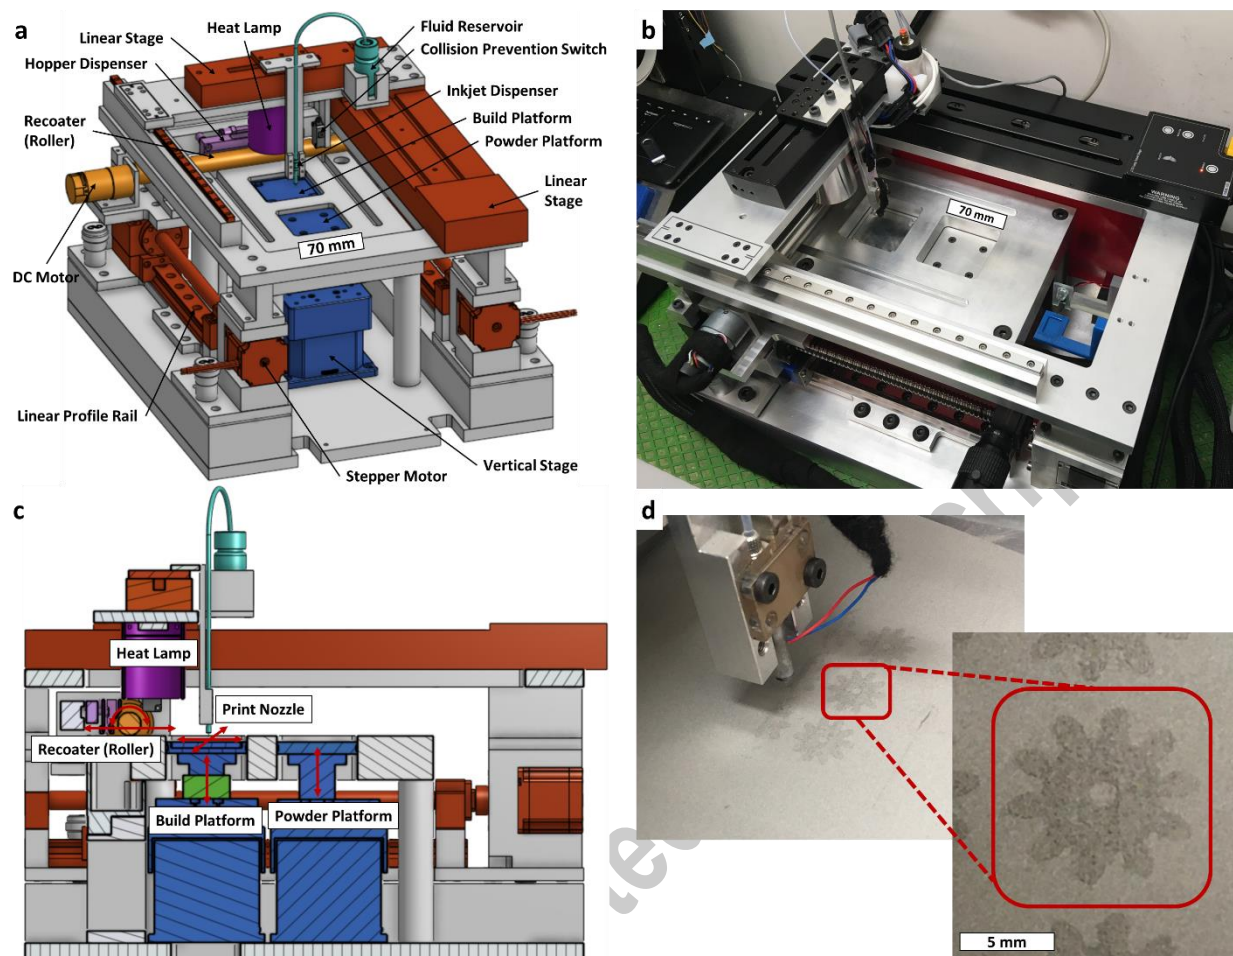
Binder jetting testbed: (a) CAD model showcasing major components with roller installed as the powder spreading tool; (b) fabricated binder jetting testbed; (c) sectional side-view highlighting moving components and trajectories; (d) images from binder jetting experiment using stainless steel 316L 15-45 μm powder and polymer binder, printing an array of gear geometries on the build platform.
